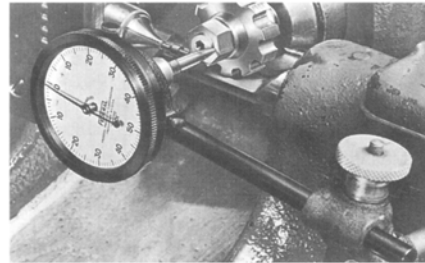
Perpendicular indicators have the spindle at a right angle to the face. They are mounted on a rod on the side. (Courtesy of Federal Products Corp.)
